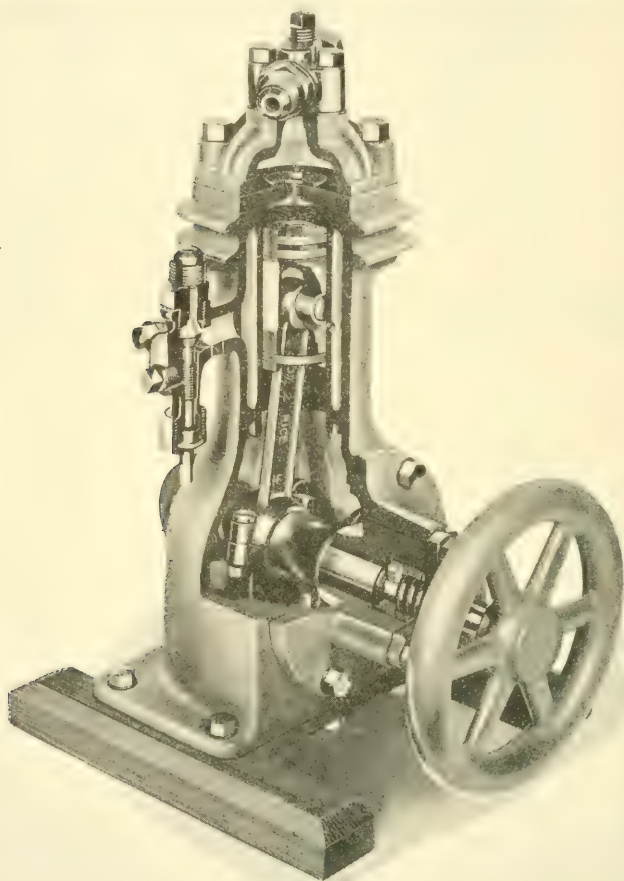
SECTIONAL VIEW OF RICE COMPRESSOR.
